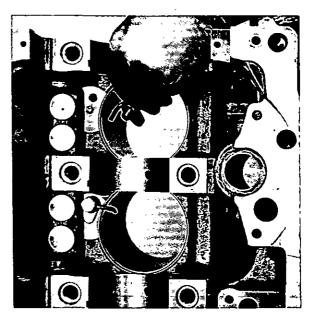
shows the dimensions taken on the top face of the cylinder block and it will be seen that the measurements of 1.781 in (45,24mm) and 0.641 in (16,28mm) are taken from two sides of the liner bore as illustrated.
